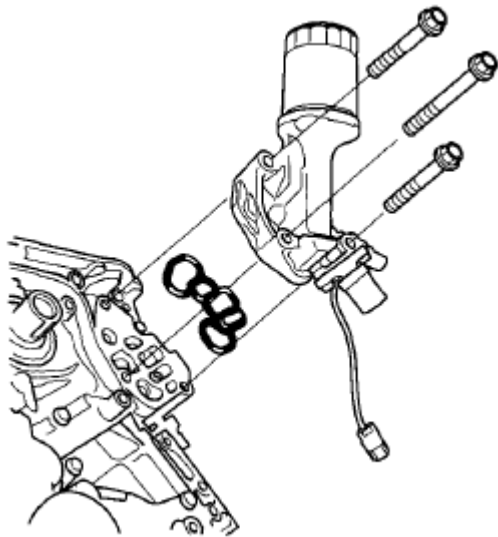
Identifying Rocker Arm Oil Control Solenoid/Oil Filter Assembly
